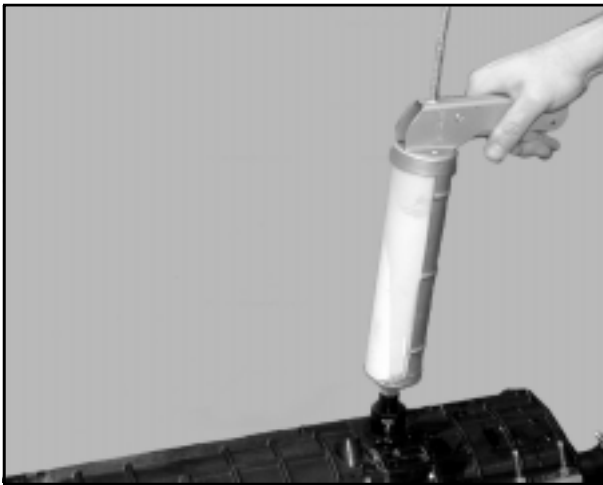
CAULKING TUBES & CAULKING GUN
